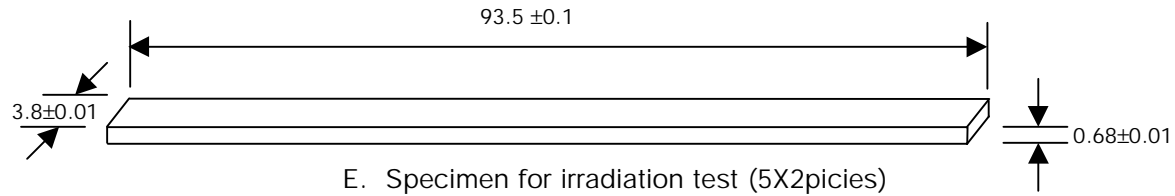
Specimen assembly in the case identified as 'CLADDING' for irradiation in 00M-01U capsule
